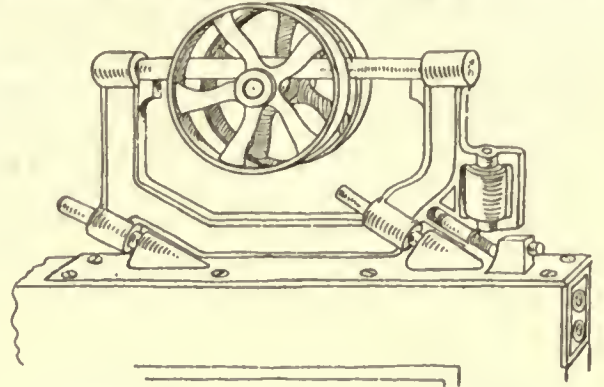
Prindle Parlor-door Hanger. Prindle Mfg. Co.
